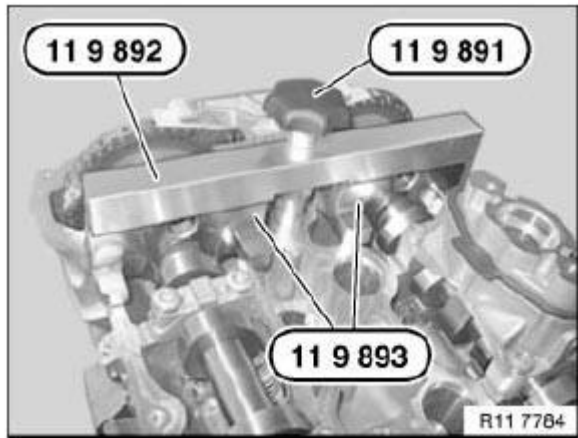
Identifying Special Tool (11 9 892, 11 9 893 And 11 9 891)
